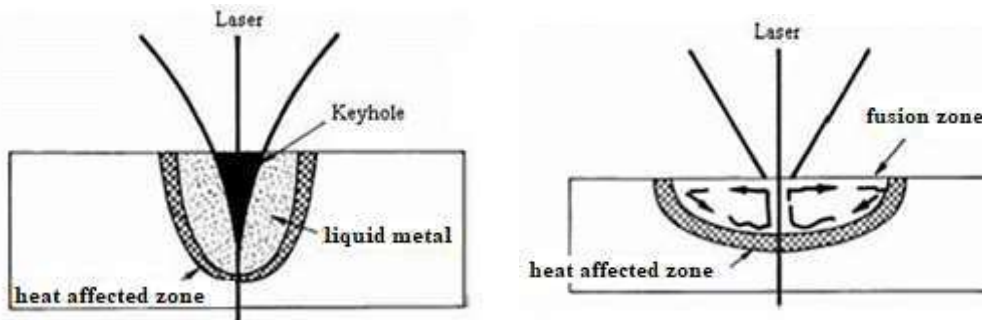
Keyhole welding (left) and conduction welding (right) [12]
